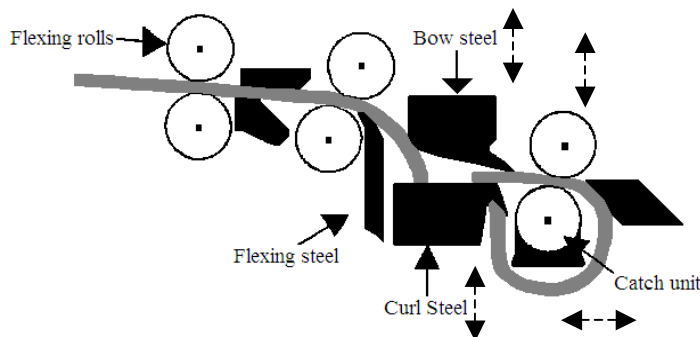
Schematic of the rounding unit within the body maker prior to welding. The picture shows the blanks being formed with flexing rolls and steels. The dashed arrows indicate the movement of the rolls and steels
